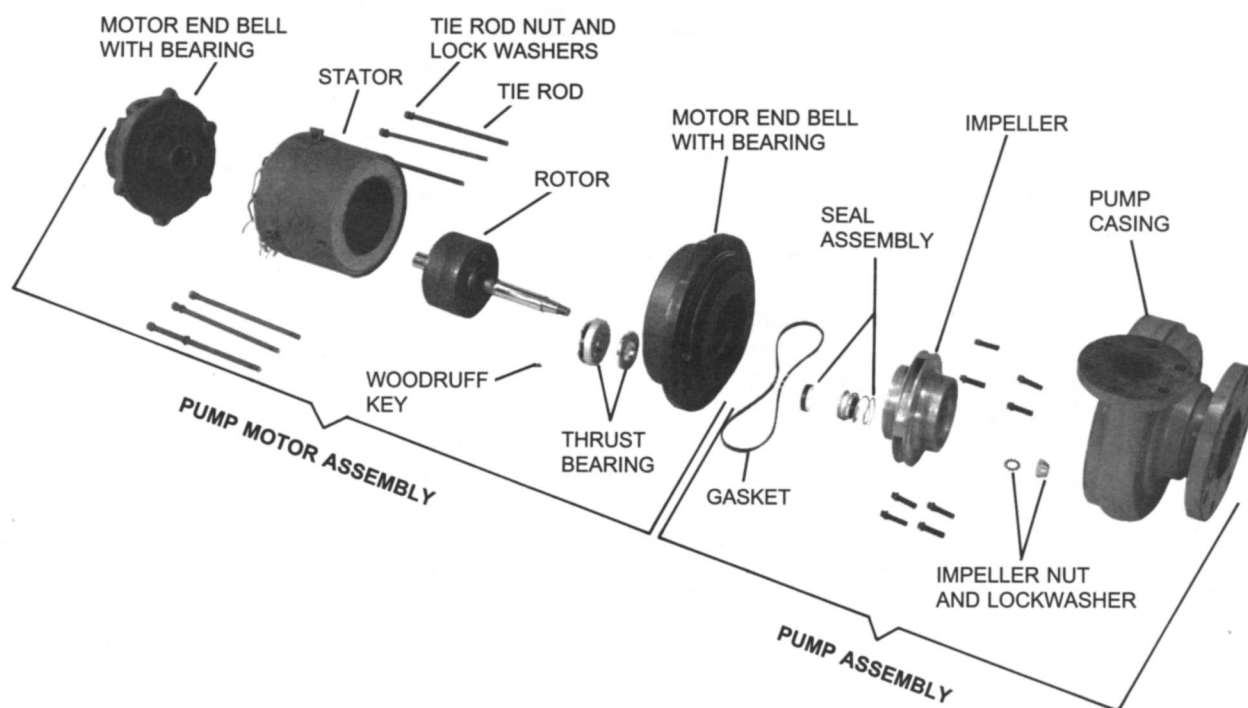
EXPLODED VIEW OF HERMETIC MOTOR AND PUMP ASSEMBLY
